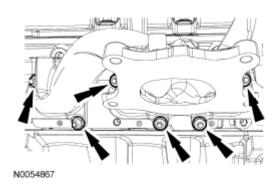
Locating RH Exhaust Manifold Nuts Courtesy of FORD MOTOR CO.
